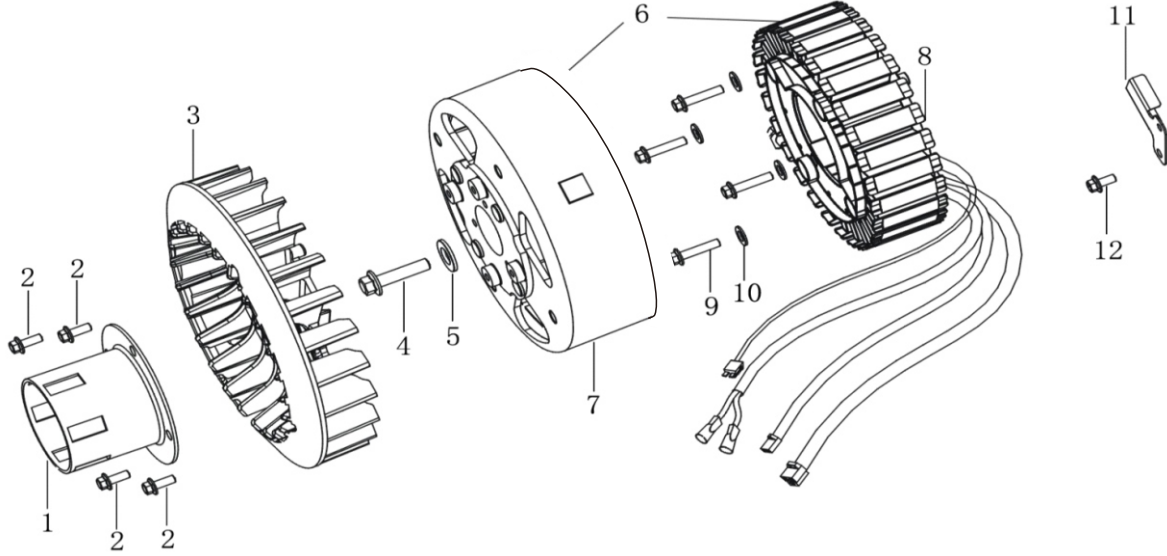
ROTOR.STATOR-GN4500iePW
